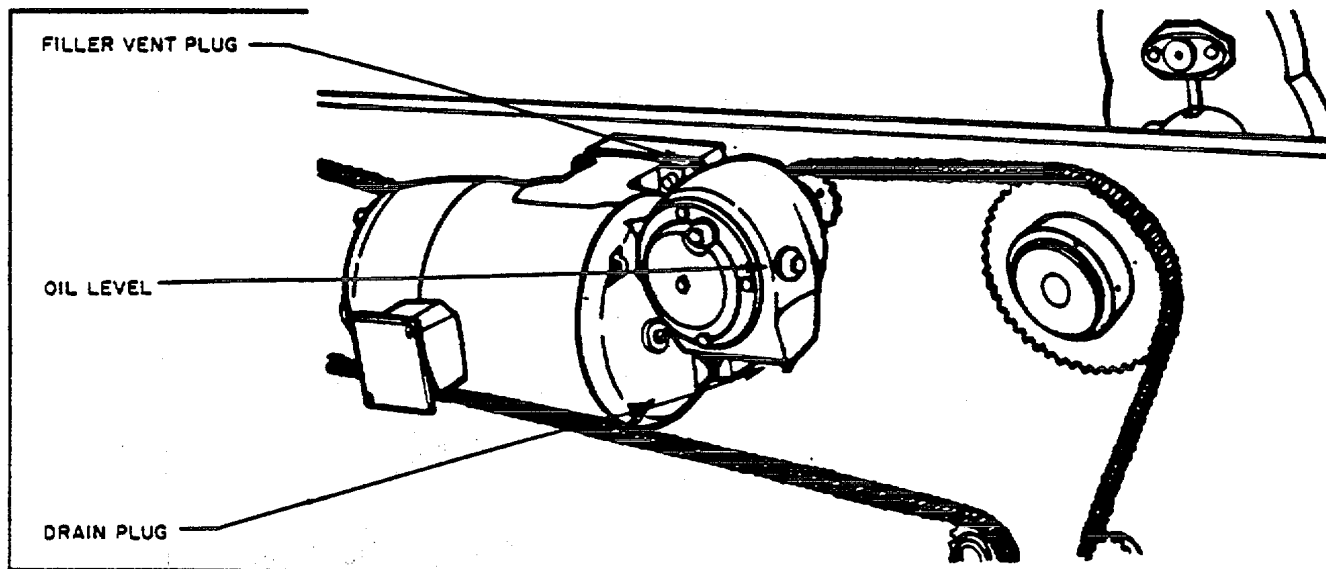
Motor and Drive for Front Operated Motorized Back Gauge
